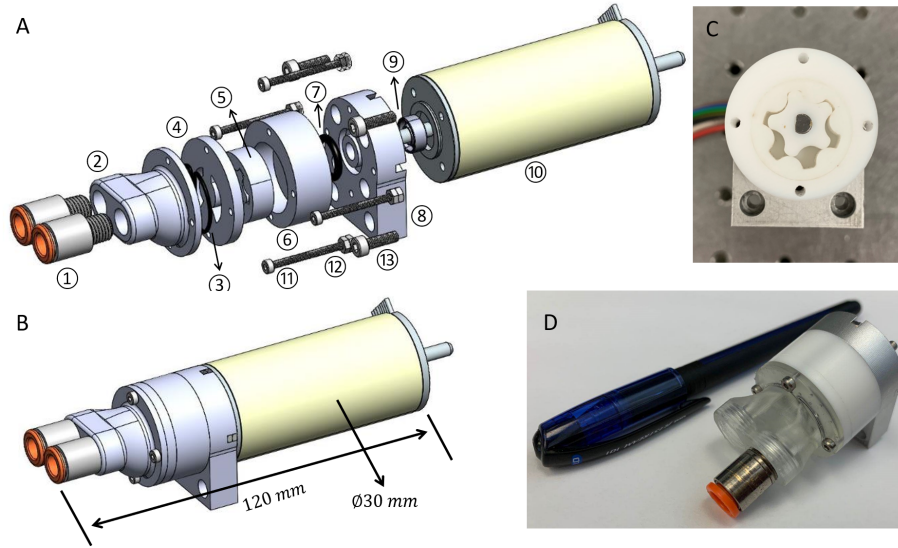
(A) Exploded view of CAD design. (B) Isometric view of CAD design. (C) Photo of the pump core. (D) Photo of the pump head with a pen.
